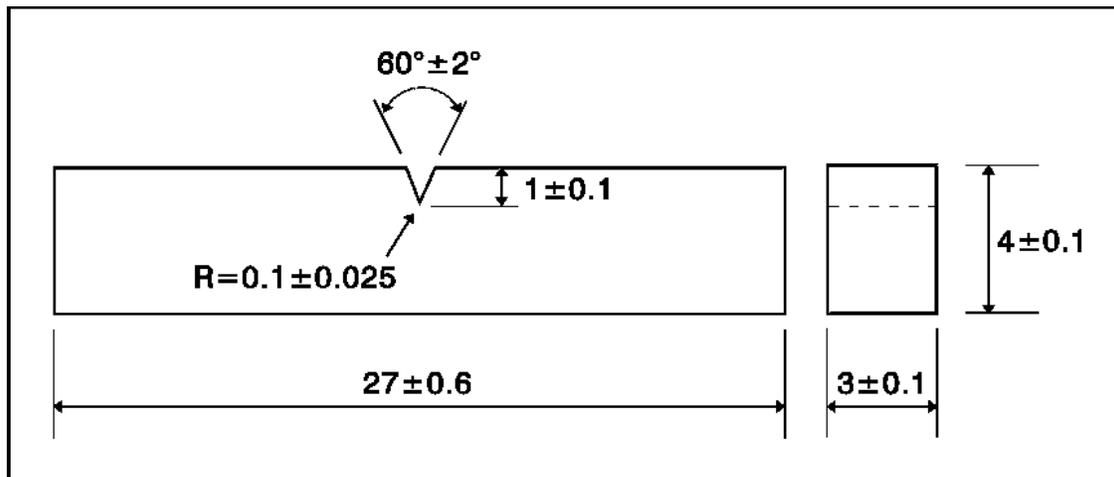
Sub-size specimen of the KLST type used in this investigation (dimensions in mm).
